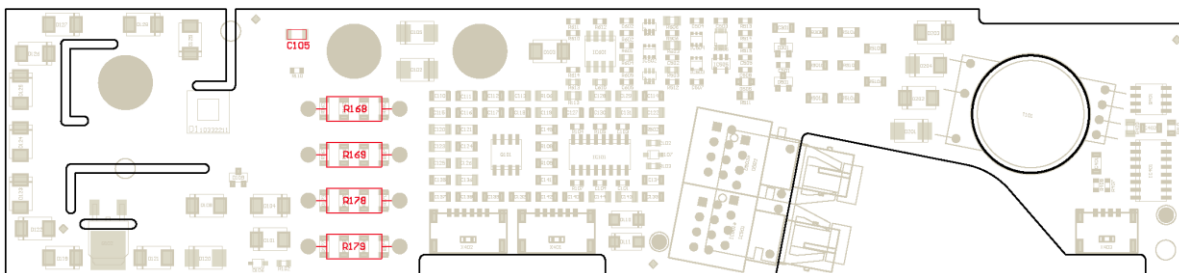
Assembly drawing of 1SP0635x2M1 with highlighted gate resistors
